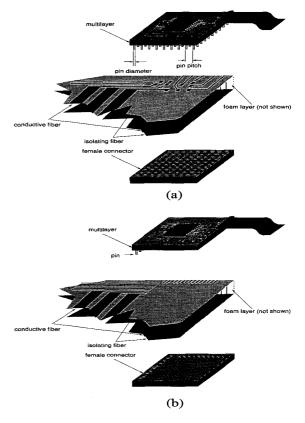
2D (a) and 1D (b) Pin Array connector embedded in the PCB
